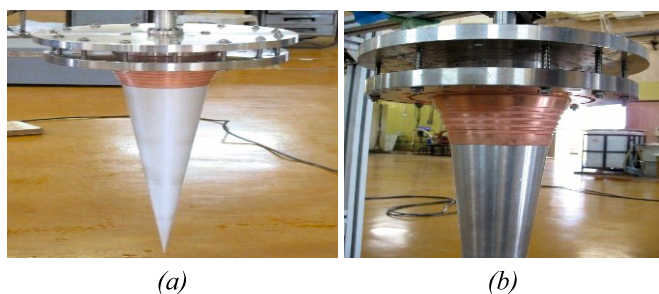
(a) Mandrel parts after assembly and (b) close up view of mandrel and flange joint.
